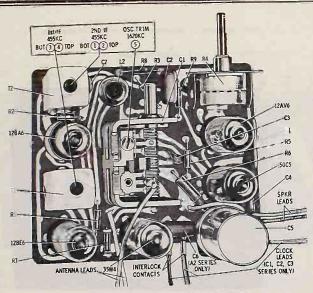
PLATED CHASSIS BOARD WIRING AS VIEWED FROM BOTTOM SIDE (COMPONENTS SHOWN ARE ON OPPOSITE SIDE)
